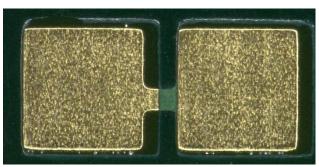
Non Solder Mask Defined Pads on Test Board #1 The second test board is an automotive design with larger pad placements. Many of the pads are solder mask defined. In absence of the troughs next to the pad, there is less risk of solder balls being wedged next to the pads (Figure 21).
